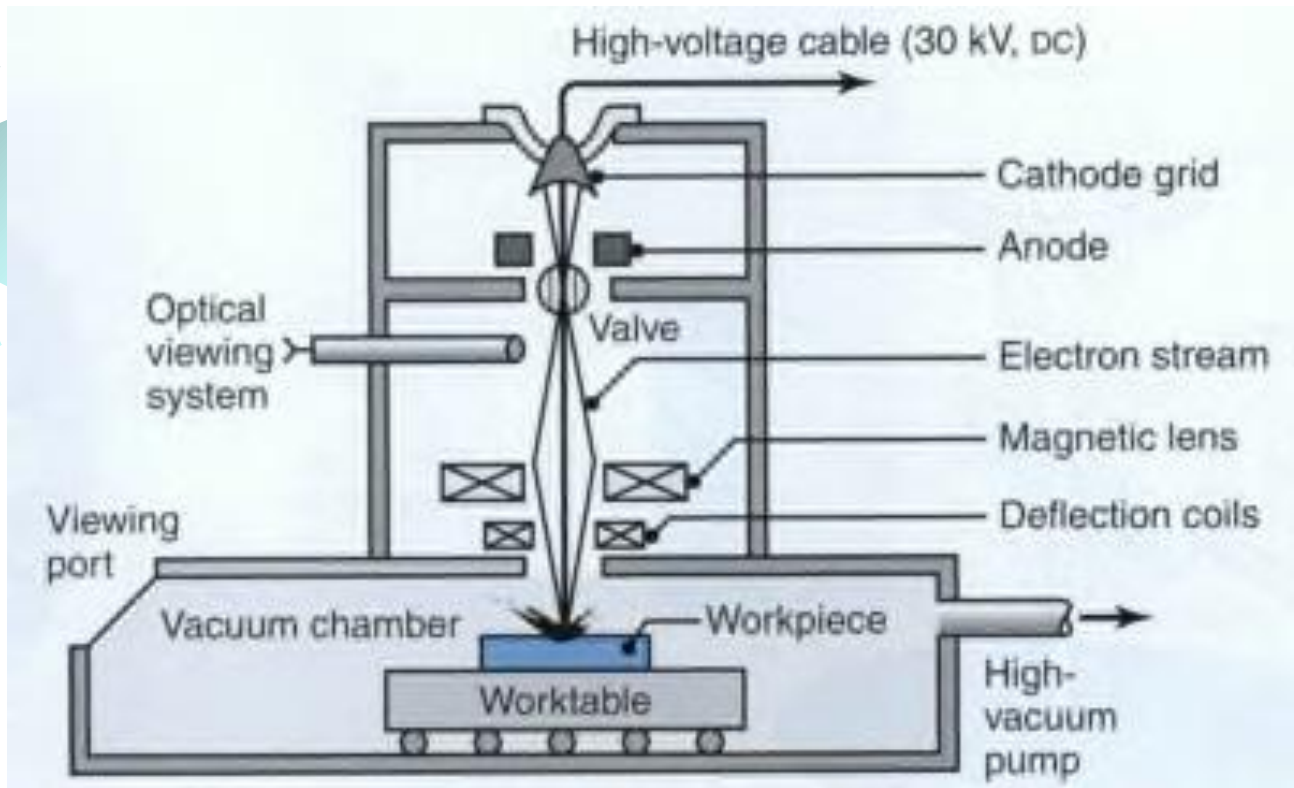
Schematic illustration of the electron-beam machining process; unlike LBM, this process requires a vacuum, so the workpiece size is limited to the size of the vacuum chamber.
